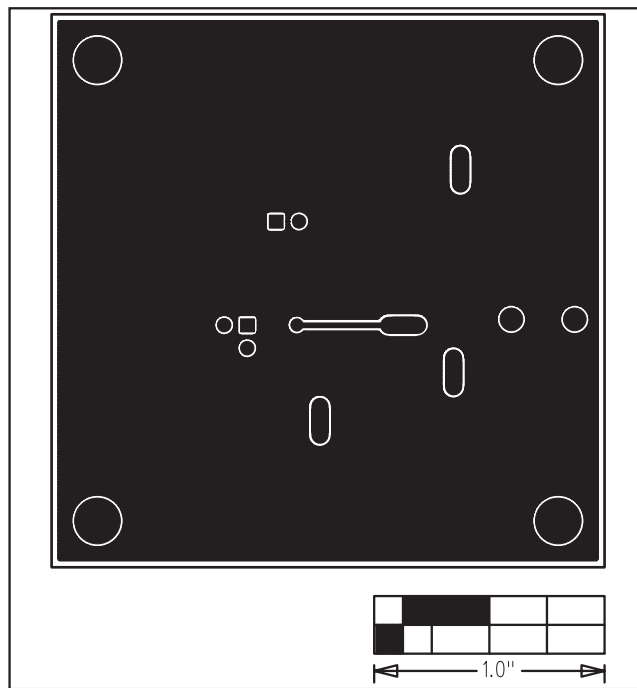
MAX9716 EV Kit PC Board Layout—Solder Side
